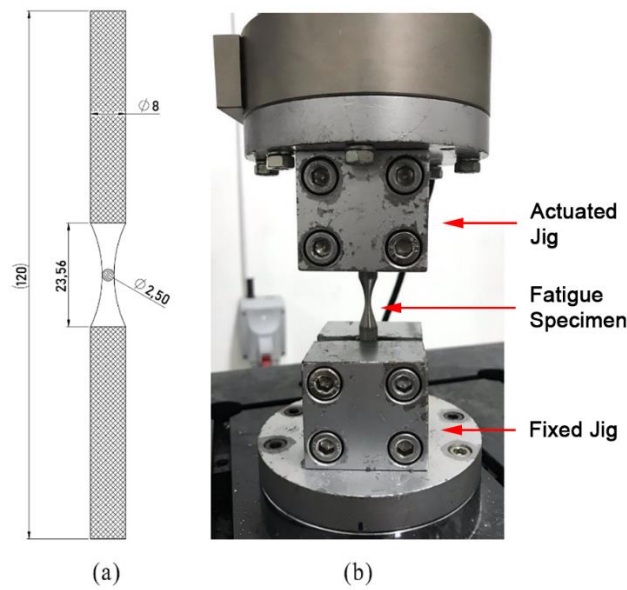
Fatigue specimens Ti-6Al-7Nb as-cast (a) detail dimension and (b) installation fixture test.
